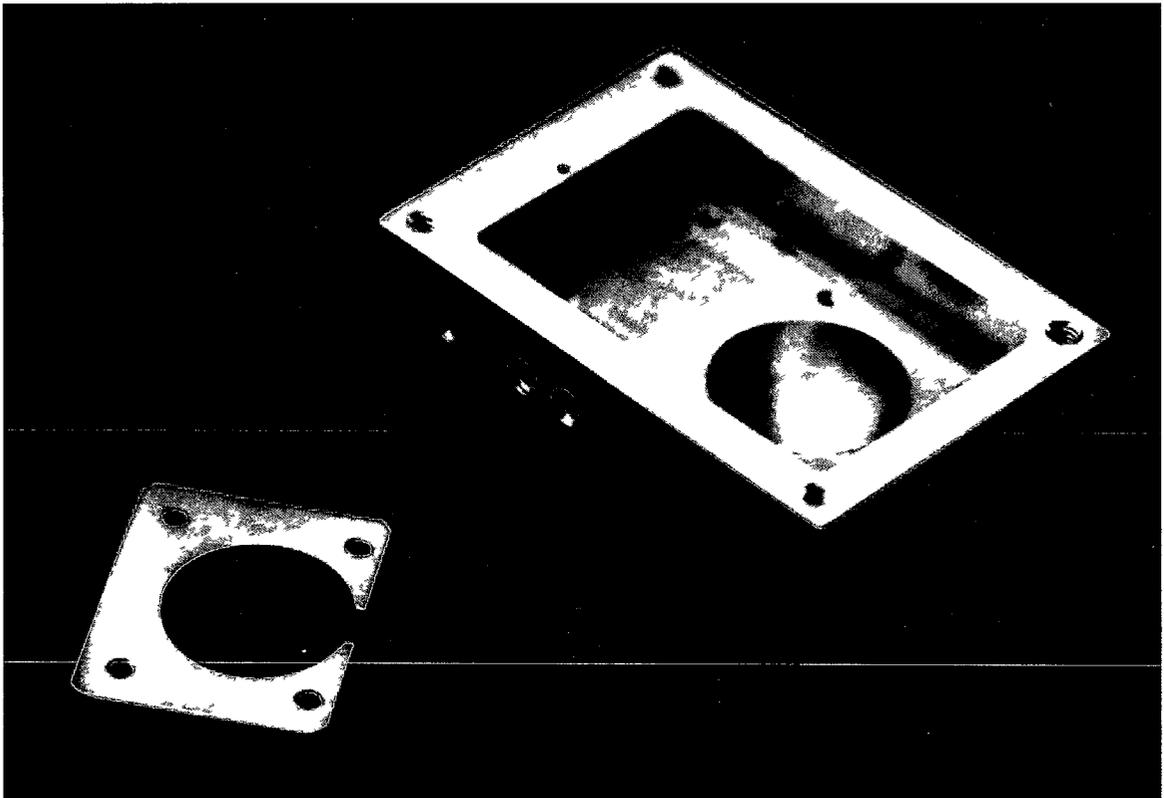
A picture of the gold-plated clamp and the jig packaging
